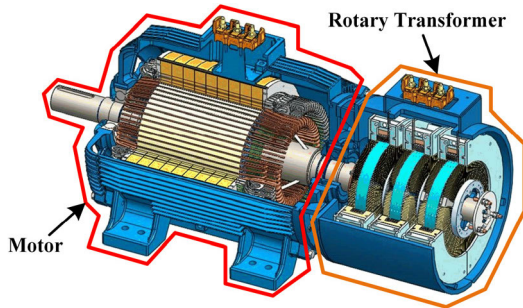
Doubly fed three-phase induction machine with a rotary transformer.
